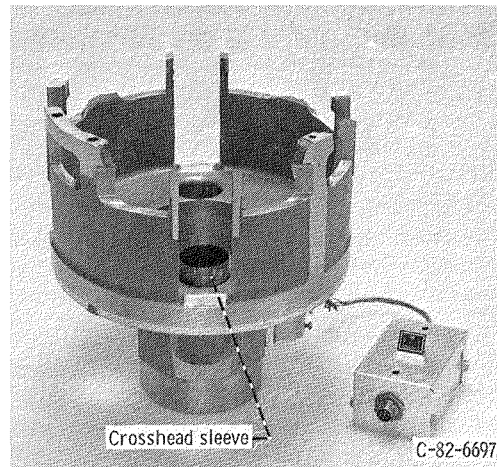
Damaged rear crankcase from drive system failure; note the crosshead sleeve stuck in bore.
